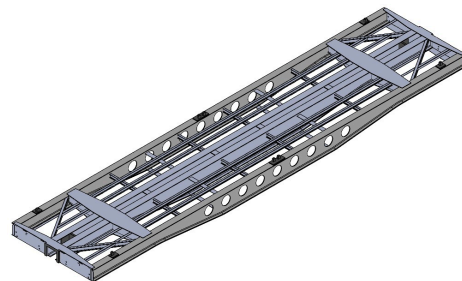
Spatial model of the supporting structure of a railroad flat wagon with perforation in the walls of main longitudinal beams
